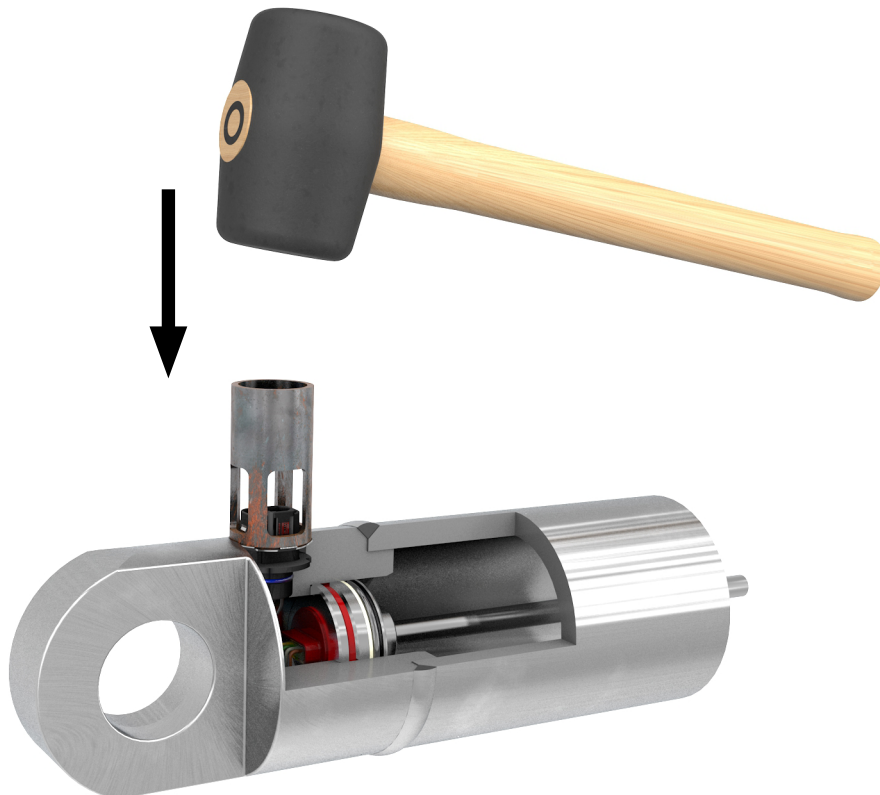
Mounting sensor with DT Connector – 1-piece version, part 3
